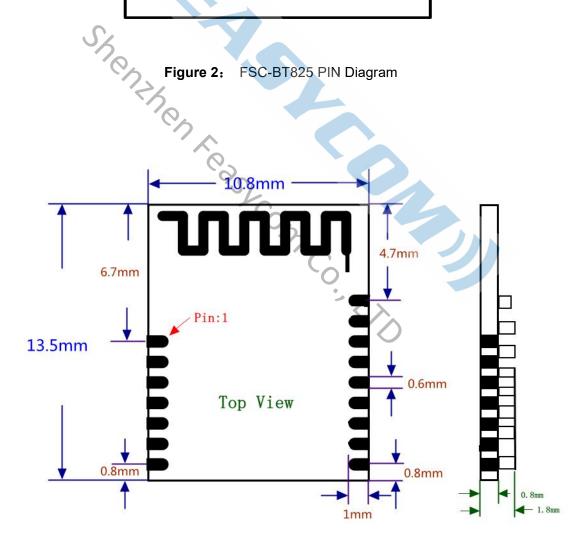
Pin Configuration and Package Dimensions (TOP VIEW)
